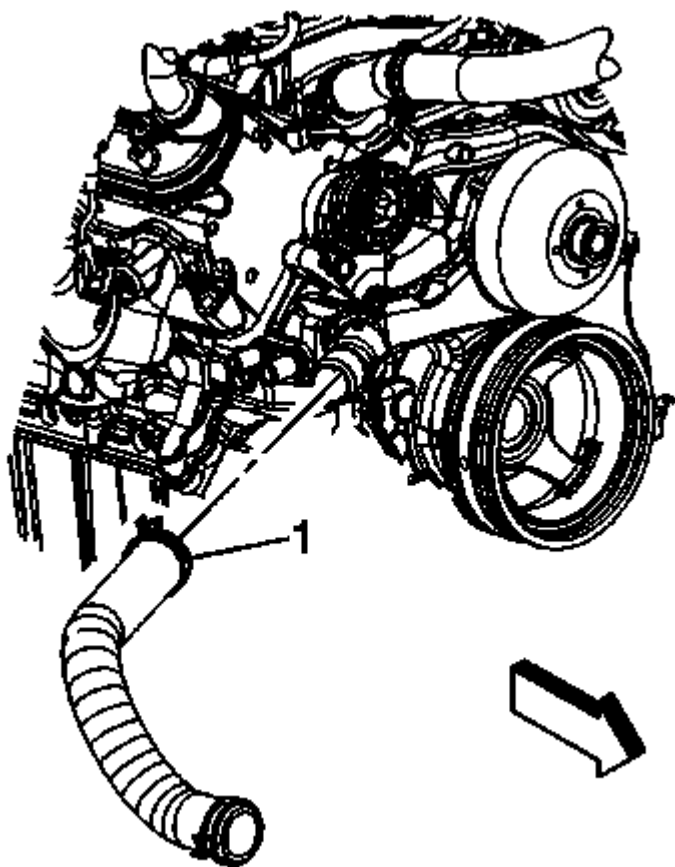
Radiator Outlet Hose Clamp At Water Pump
